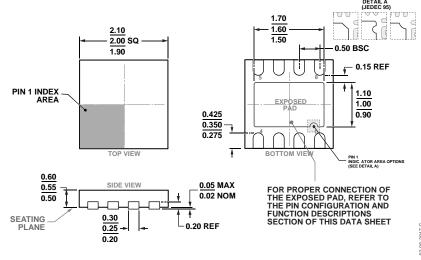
8-Lead Lead Frame Chip Scale Package [LFCSP] 2 mm × 2 mm Body and 0.55 mm Package Height (CP-8-10) Dimensions shown in millimeters
